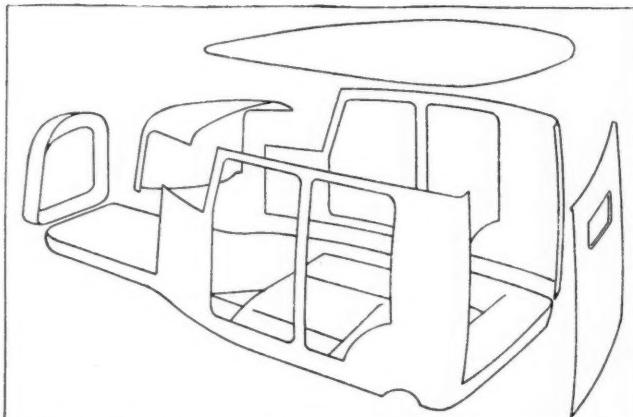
Sketch of body parts which can be assembled by means of rubber compression joints
